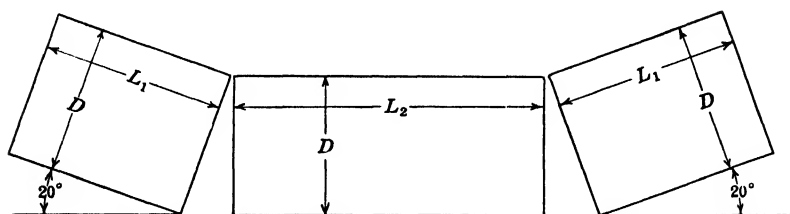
Idler Rolls without Through Shafts; Closed-end Bearings.
